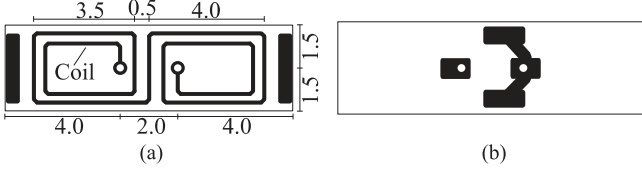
2-D renders of the infinity sensor variant design used in this work. (a) Bottom view (sense coils with vias to top side; dimensions in mm). (b) Top view (vias from bottom side with solder pads for U.FL connector).
